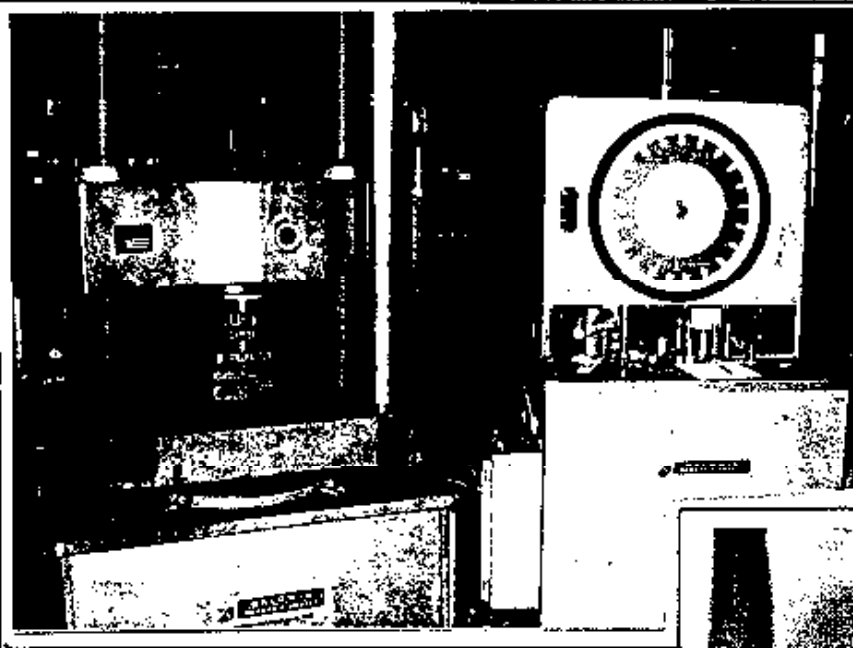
(left). - View of Satec Universal Tensile Test Machine used in conducting tensile strength tests of ZipNuts. Note test fixture mounting in test machine. All test nuts were carried to failure to develop full rated strength of the fasteners.
